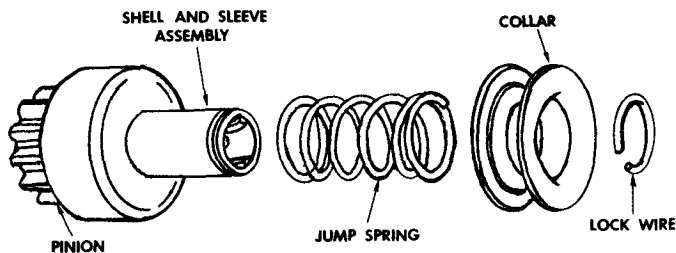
Disassembled view of late type intermediate duty sprag clutch drive assembly.
